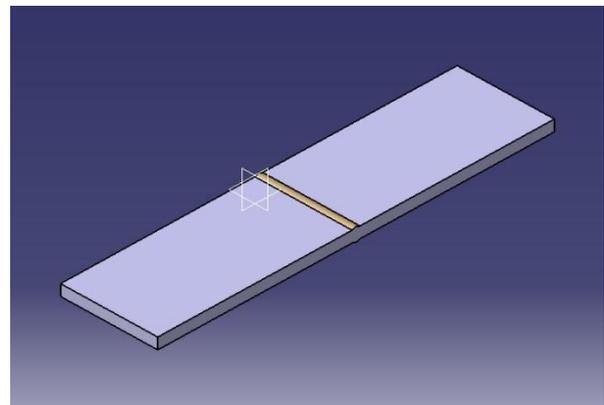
Isomeric View of Welded Plates (CATIA V5)
